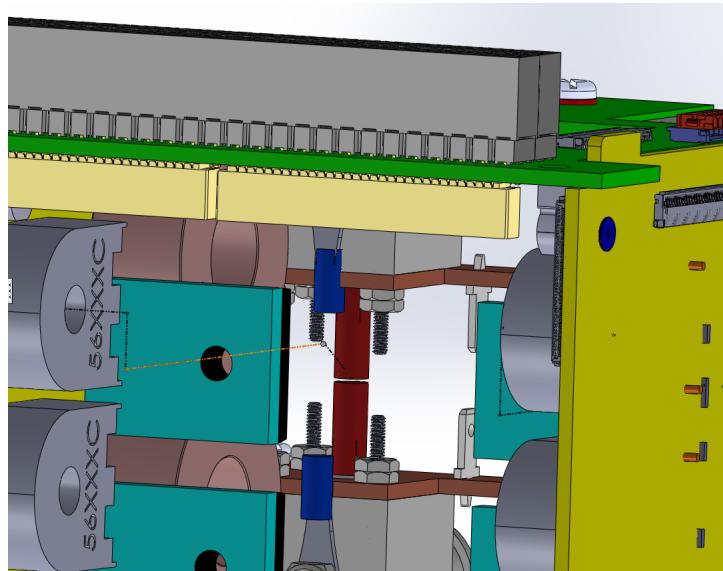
Solder and crimp a 16-22 AWG to Anode Ring Terminal (Red) on Thruster One. Run this wire to the back of BPR, through the TOP Current Transformer and Solder to the terminal. Solder the Magnetic Coil and Cathode terminal to appropriate terminals (NOT SHOWN.)
